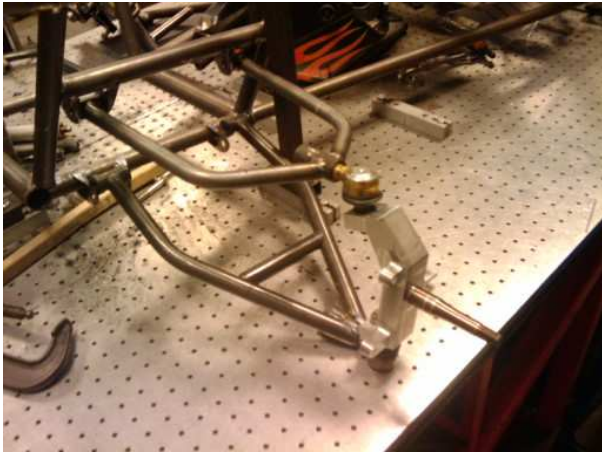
Front Suspension Design (left/driver corner). The most complicated part to fabricate as it is not cut on a CNC, and often the most commonly broken part, is a suspension control arm. These parts are damaged easily for two reasons. First, they hang off the frame and are put into harm's way in order to get the tires to the optimal location for traction. Second, the arms are designed to be weaker than the supporting frame structure. In race, an A-arm is not incredibly hard to replace—3 bolts and the arm is free from the car. If a frame member were to deform, the frame could be disqualified as being structurally unsound. Therefore, A-arms must tread between failing easily and being overbuilt. FEA analysis is vital to a designer of this system. The design of 2010's a-arms started with analyzing failures of past arms. Shown below in Figure 13 is an image of Tripp holding an upper arm from the 2008 car and comparing it to the loads it takes to deform the arm in that manner in Solid Works.
